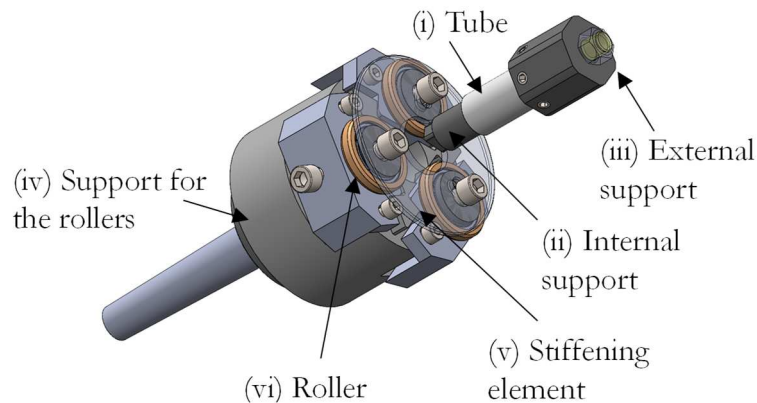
Assembly for the traditional backward tube flowforming.
